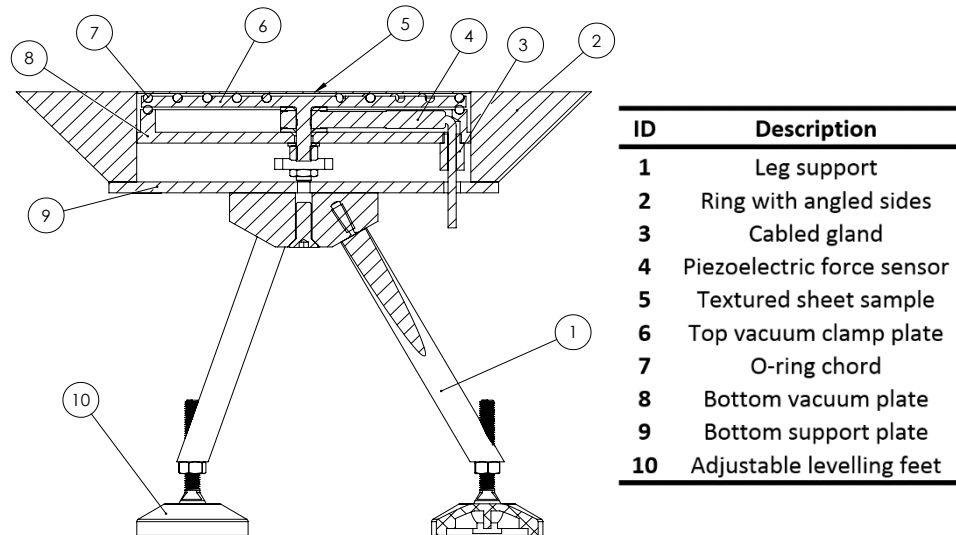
Assembly drawing (section view) of workholding solution with part list (1 of 2).
